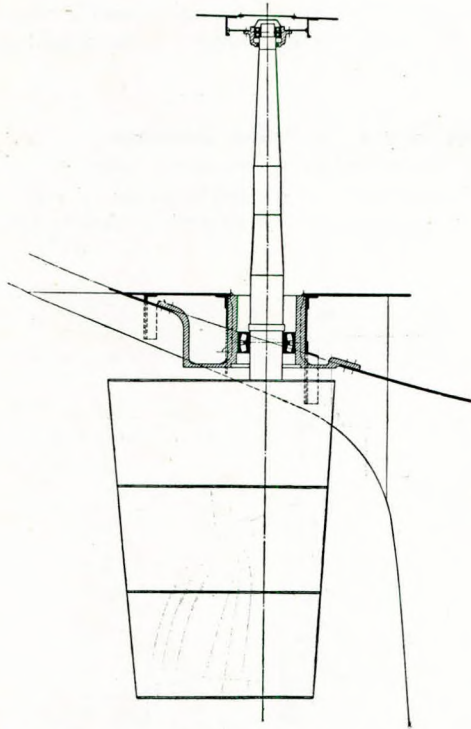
Semi-balanced overhung rudder with upper and lower self-aligning roller bearings.
